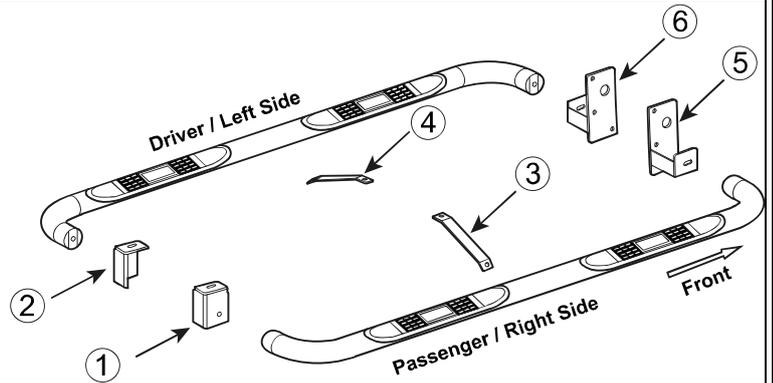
Attach the Driver/Left T4 Sidebar to the Mounting Brackets
